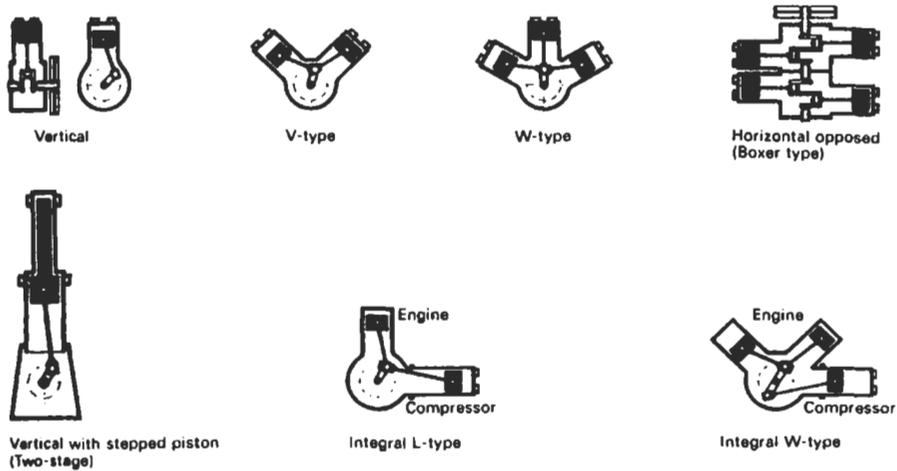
Single-acting (trunk-type) reciprocating piston compressor [23].
